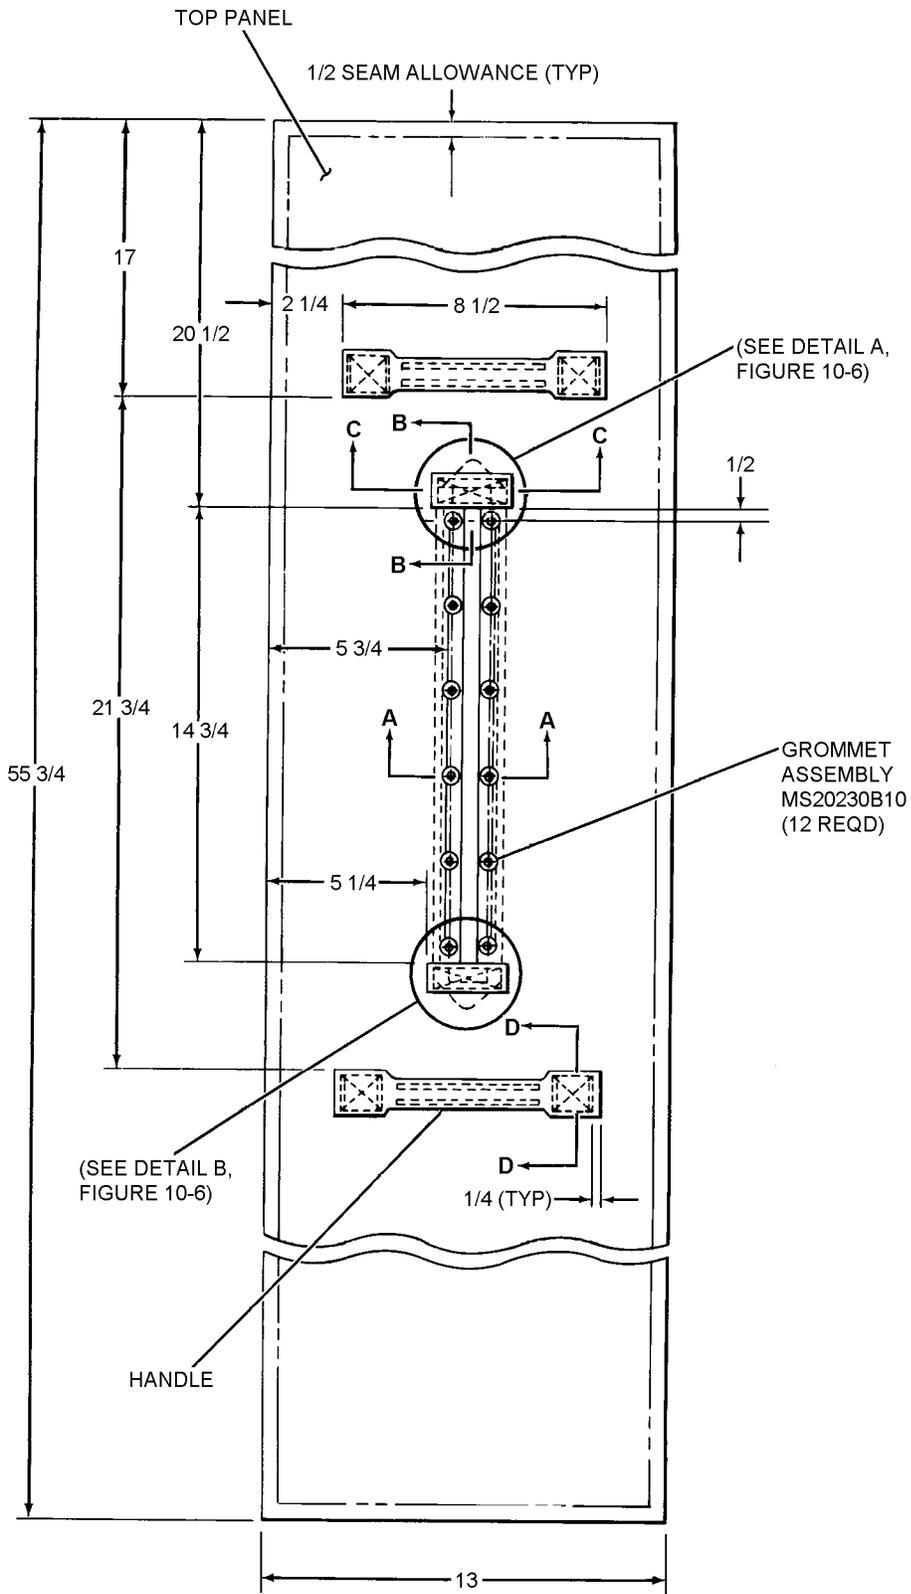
Top Panel Assembly, Survival Equipment Container Assembly (Sheet 1 of 2)
